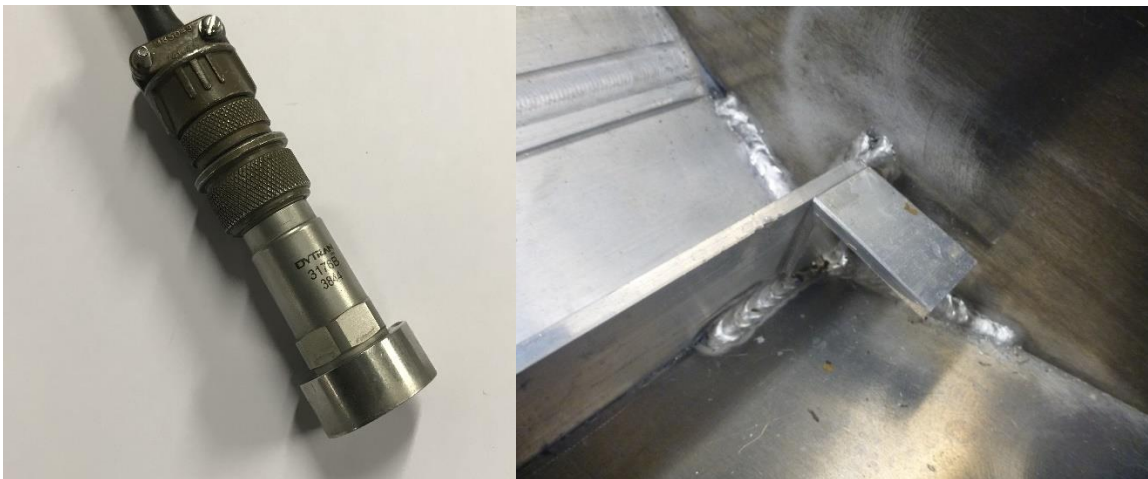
Dytran 3176B accelerometer and angle bracket for mounting in the wedge.
